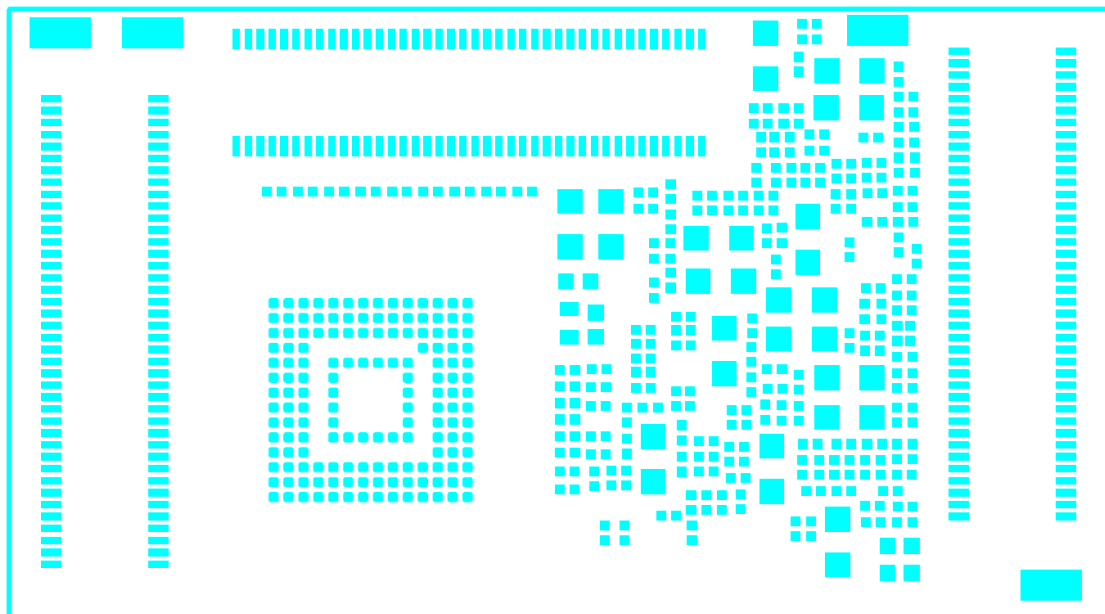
SOM Outline Dimension 36.8mmx20.4mm(+/-0.15mm)
